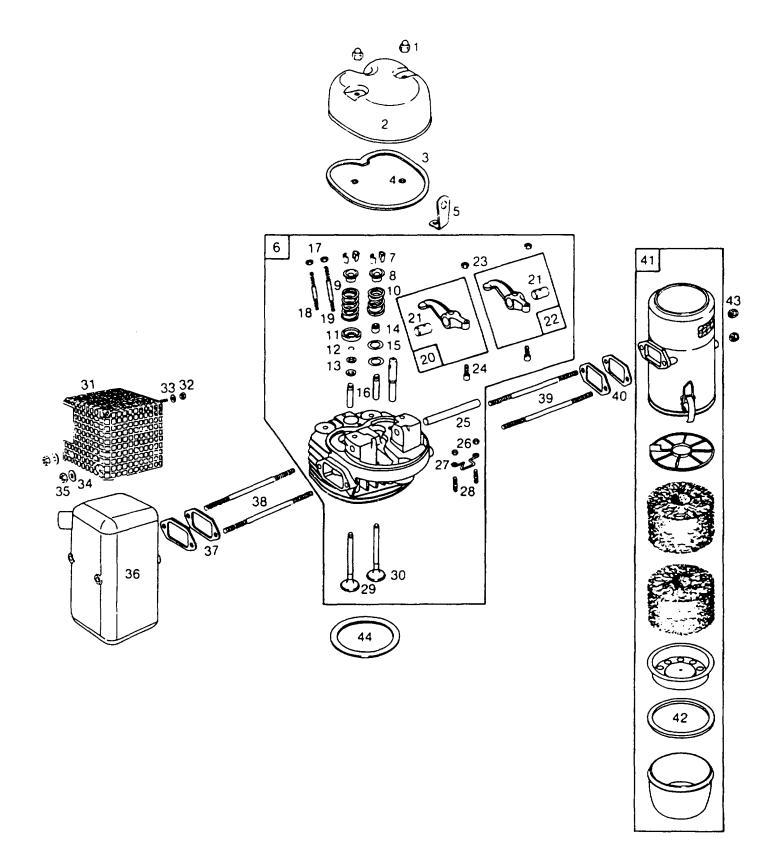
Cylinder Head, Muffler, Air Cleaner
